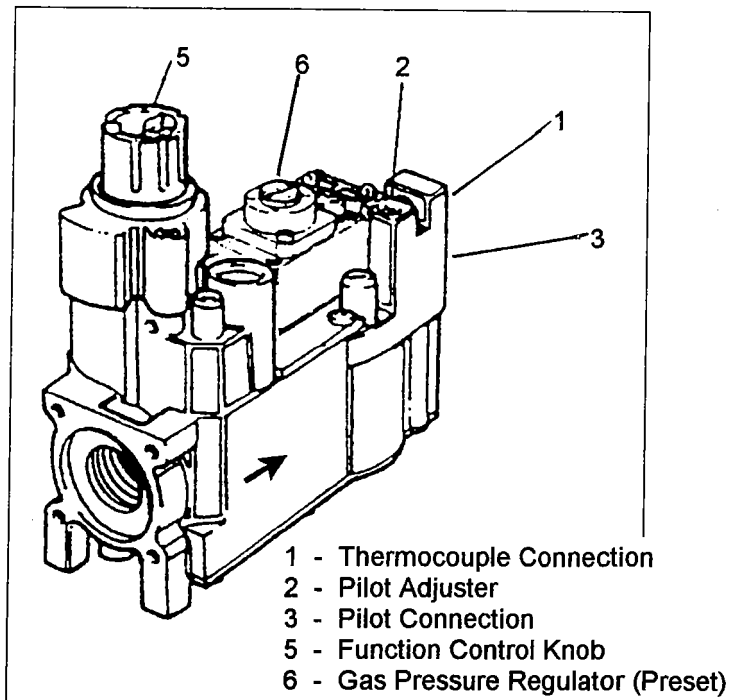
Valve Type 1A - Honeywell Thermo-Electric Valve
